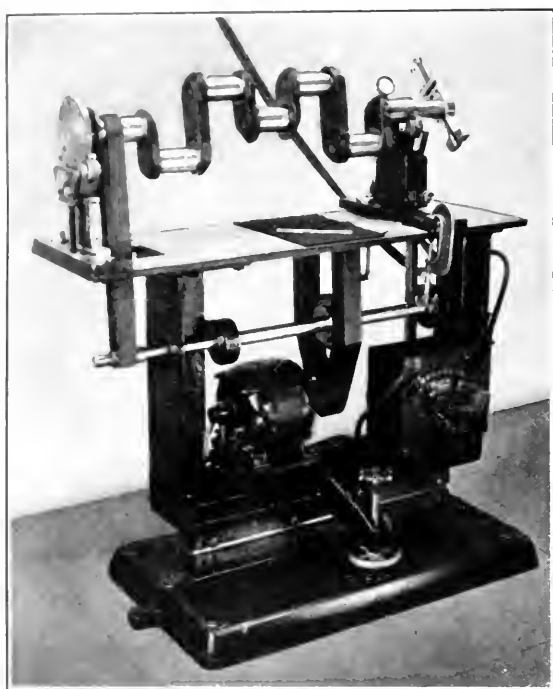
COMBINED STATIC AND DYNAMIC BALANCING MACHINE
